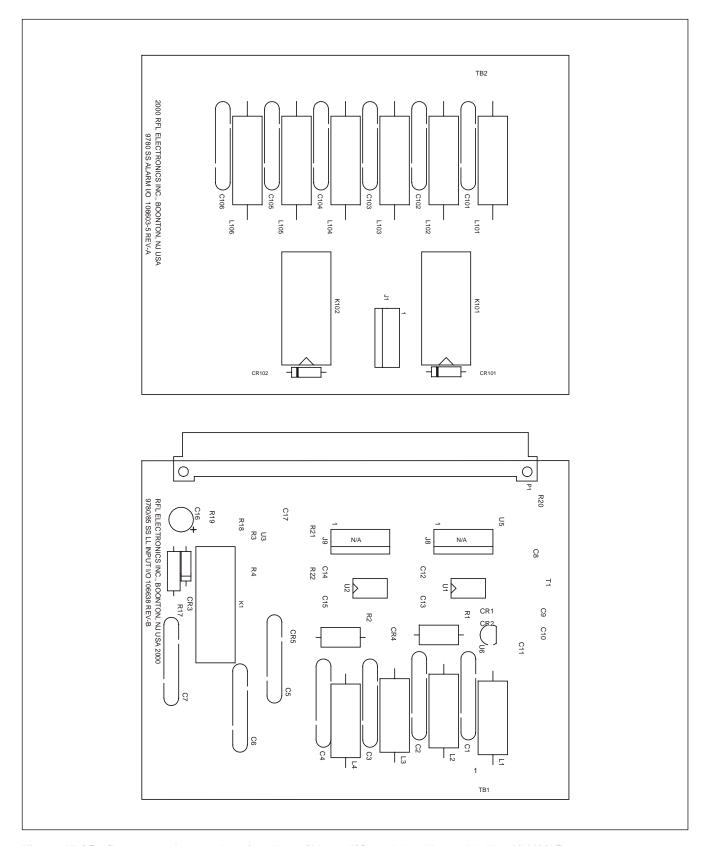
Component locator drawing, Input/Alarm I/O module. (Assembly No. 106600-5)
